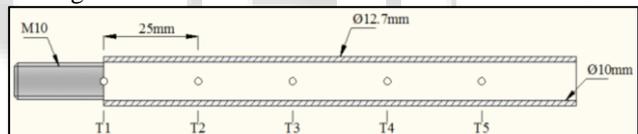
Hollow Pin Fin with Inner Diameter = 10mm
